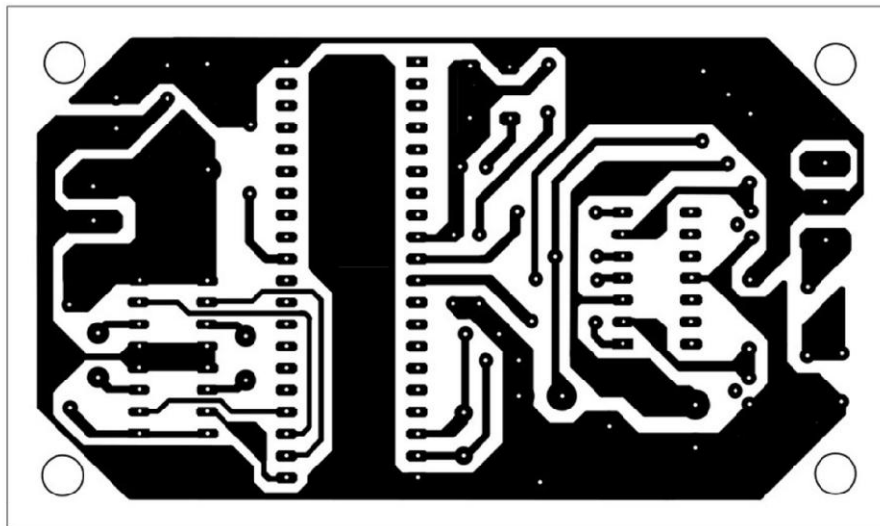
Actual-size, single-side PCB for the automated line-following robot
